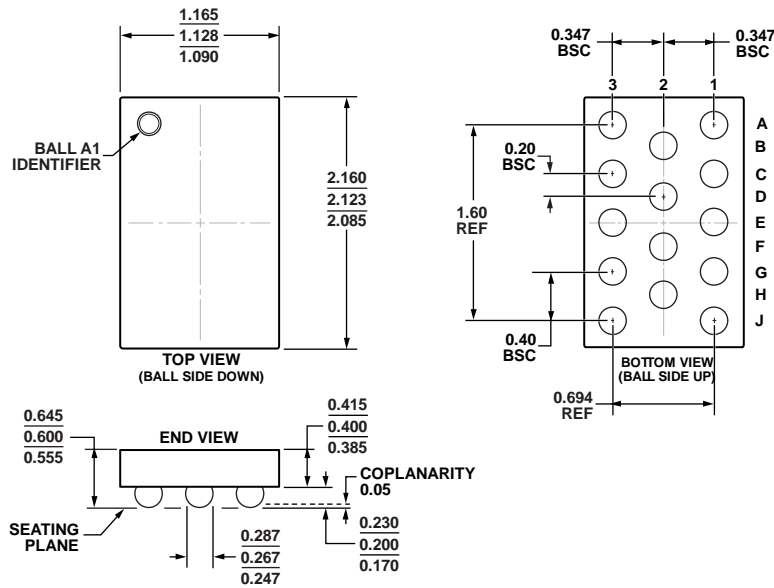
14-Ball Wafer Level Chip Scale Package [WLCSP]
